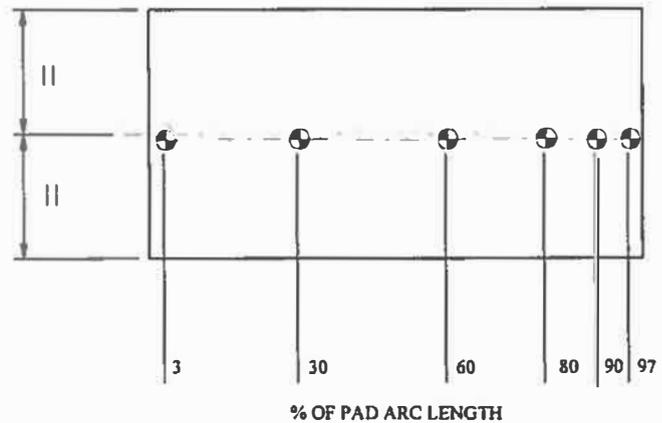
Circumferential location of thermocouples relative to pad surfaces.
